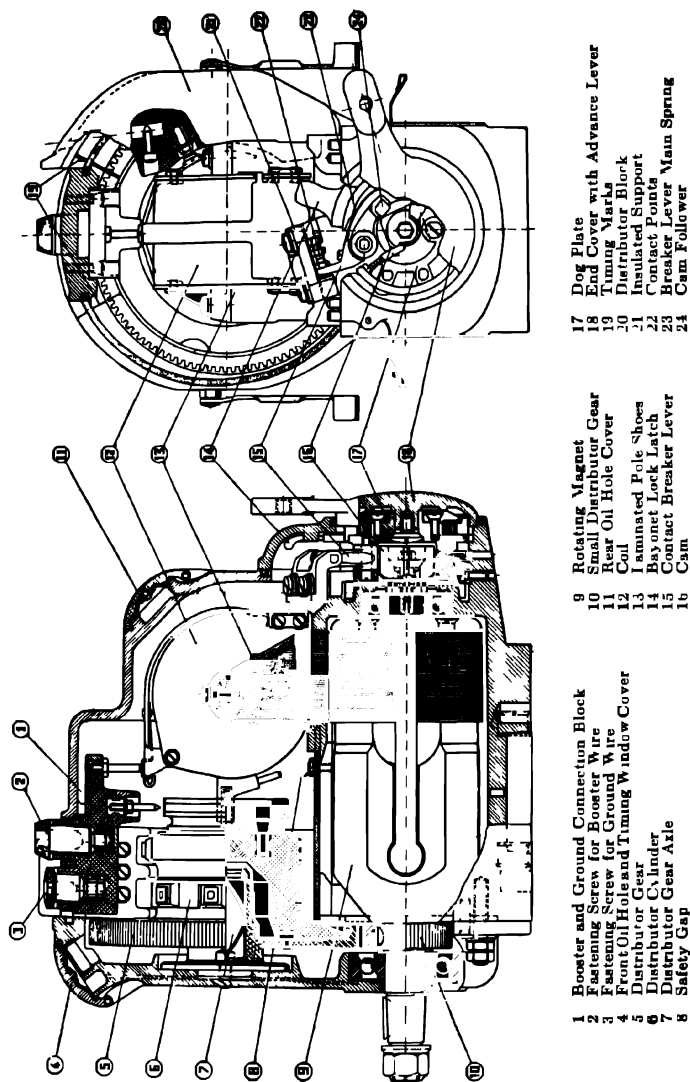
Sectional Drawing of Scintilla Aircraft Magneto.
